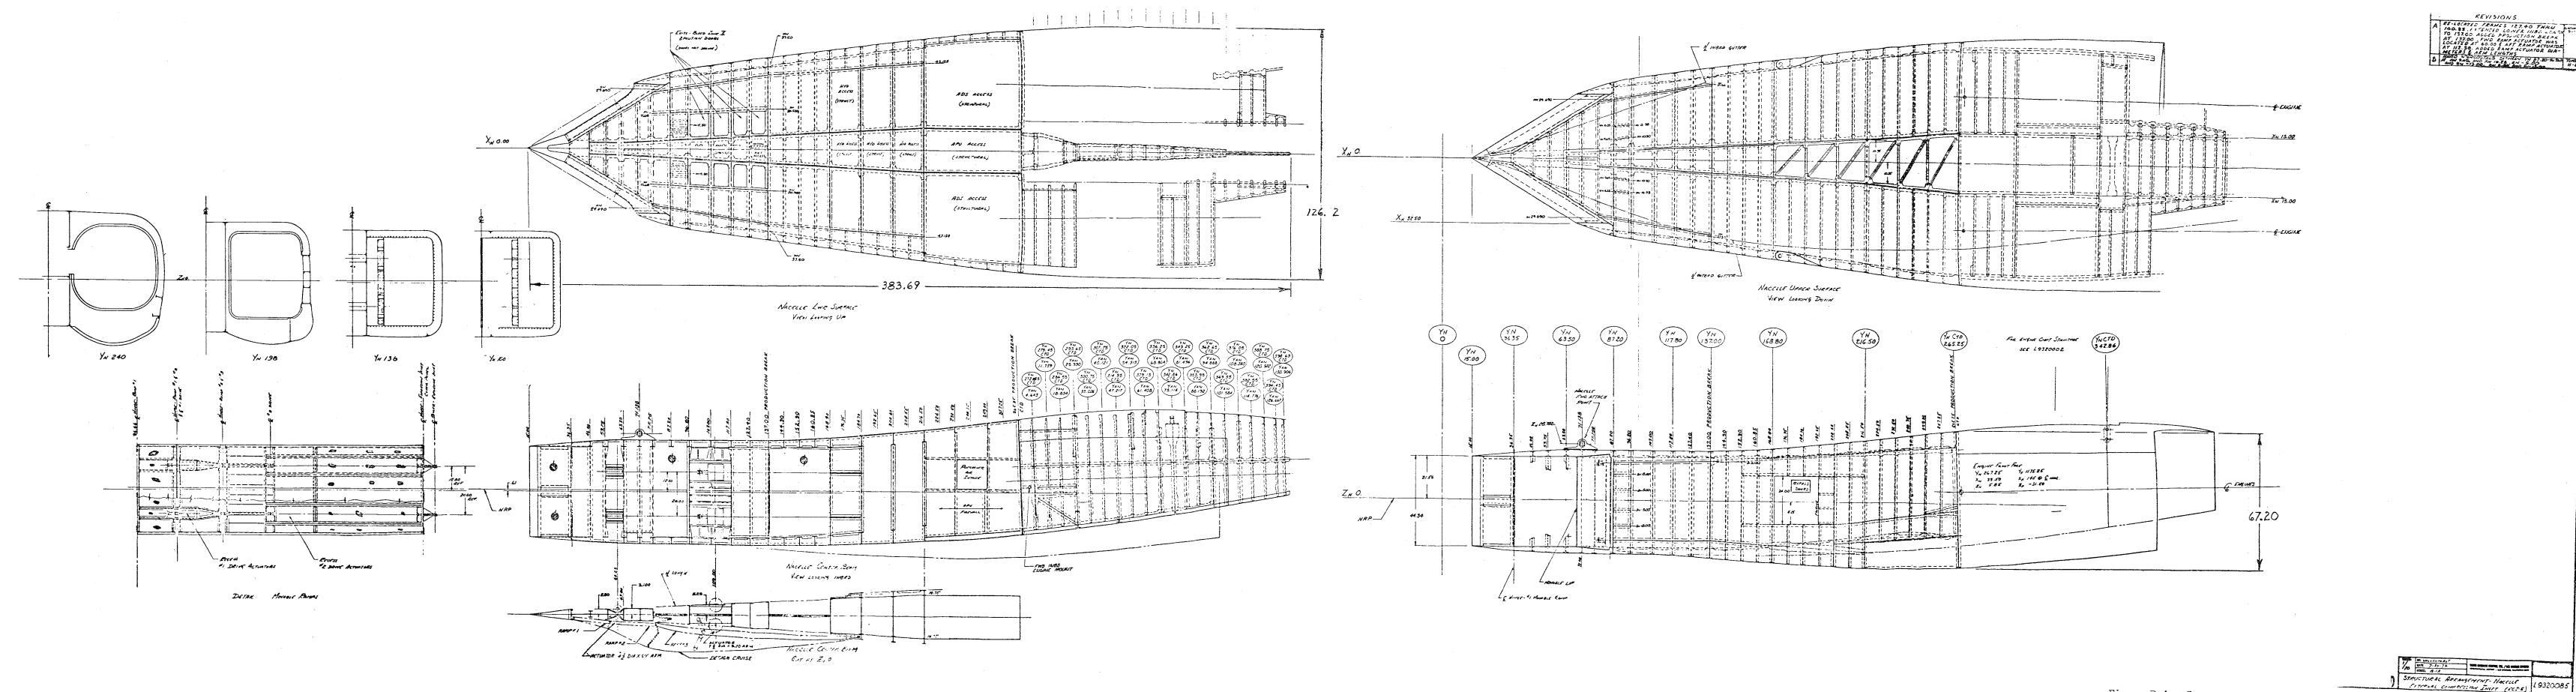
Structural arrangement - nacelle external compression inlet (RDT&E).
